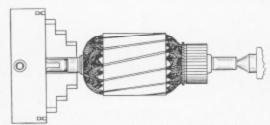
Generator Armature with Slotted End Mounted in Lathe for Machining Commutator
